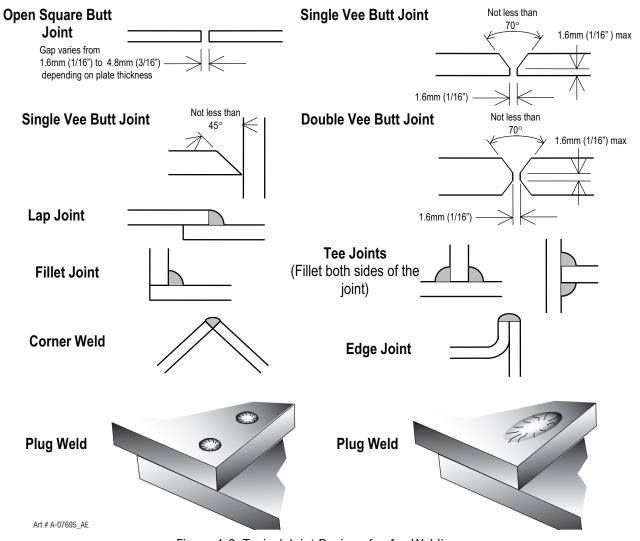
Typical Joint Designs for Arc Welding
